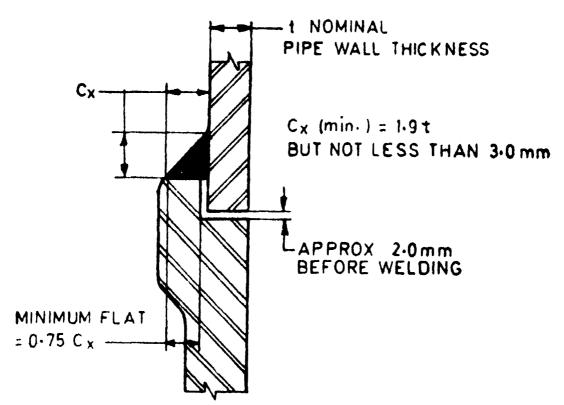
Welding Dimensions for Socket Welding Components
